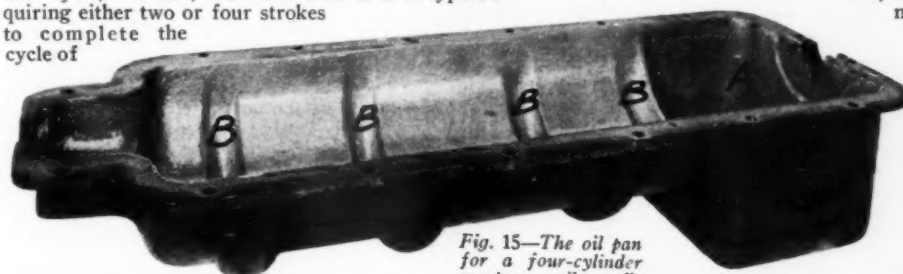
The oil pan for a four-cylinder motor, oil wells shown at B
